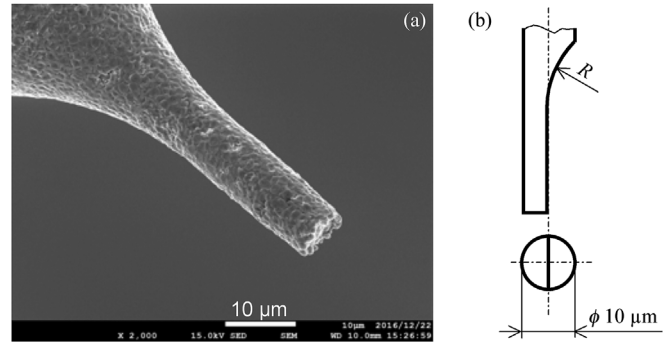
(a) Example of fabricated cylindrical tool electrode and (b) semi-cylindrical tool electrode geometry.
